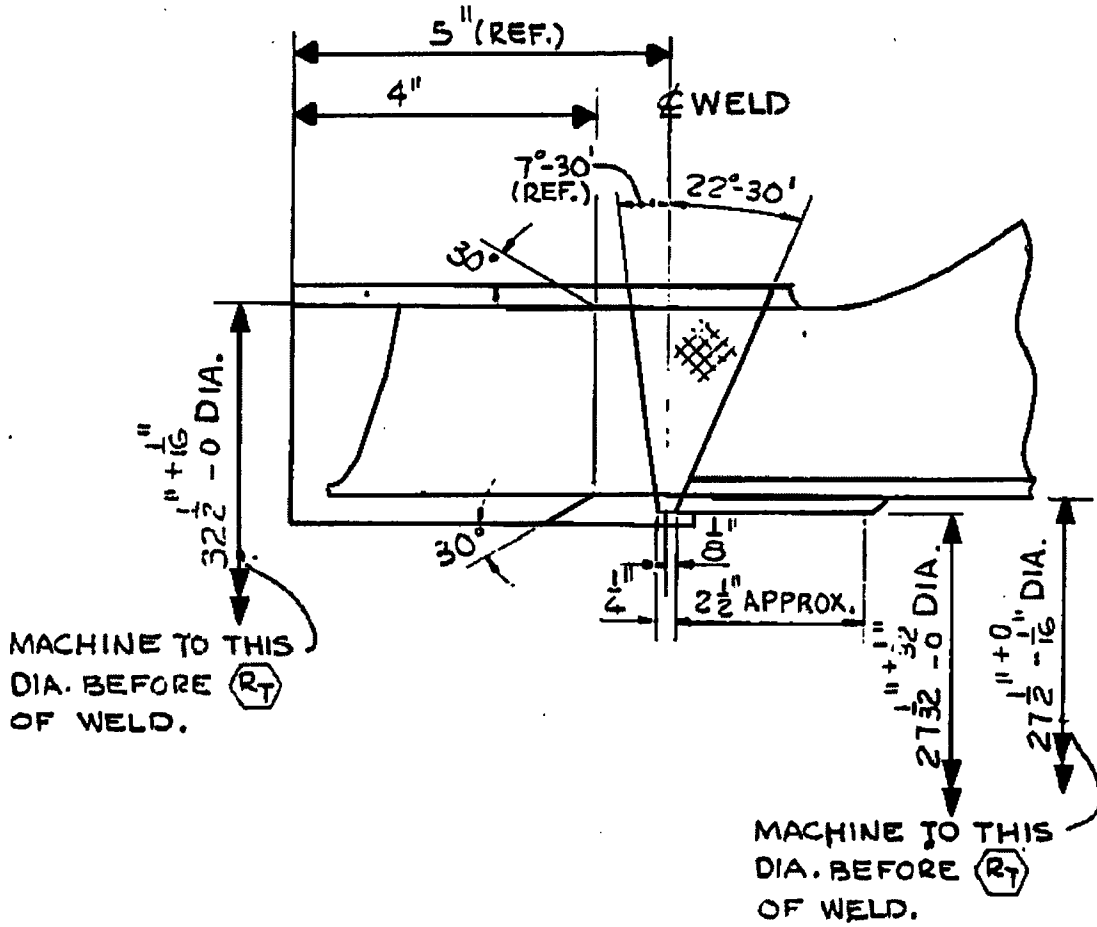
Indian Point Unit 2 Reactor Vessel Inlet Nozzle DM Weld Configuration
